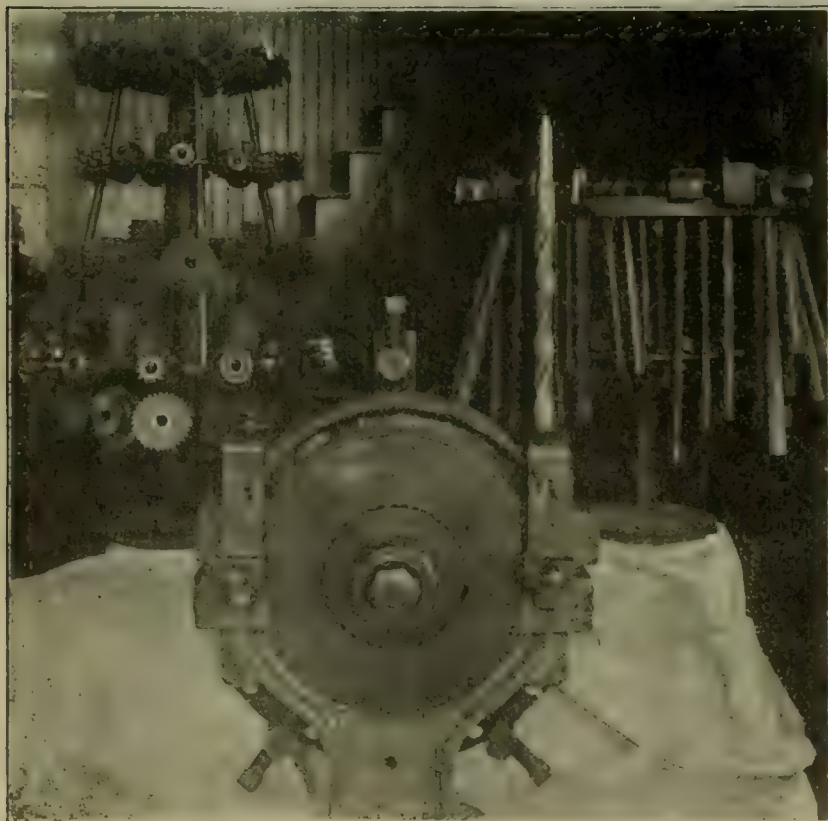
Ball Bearing Racks and Eccentric Strap Jig.
